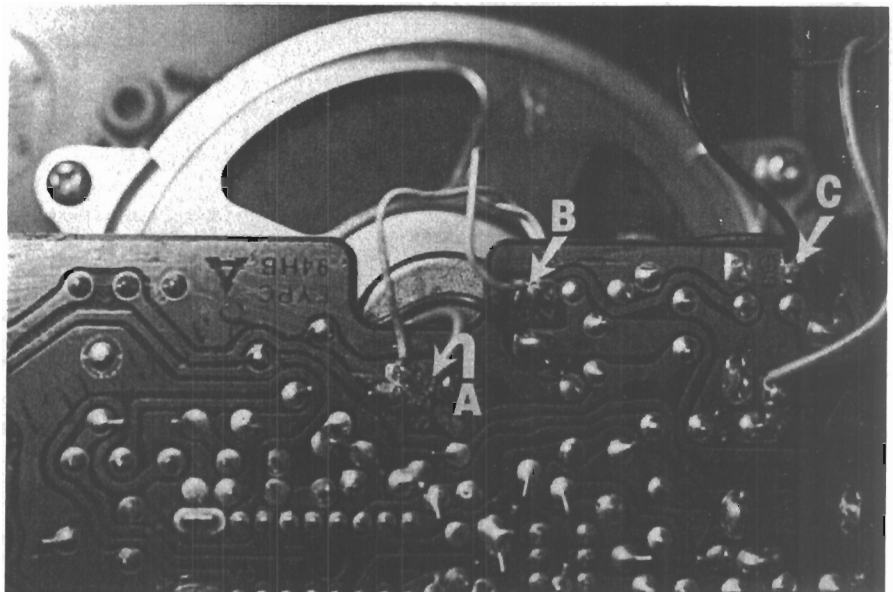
Blown-up view of the unmodified cassette PC board with key points identified.
